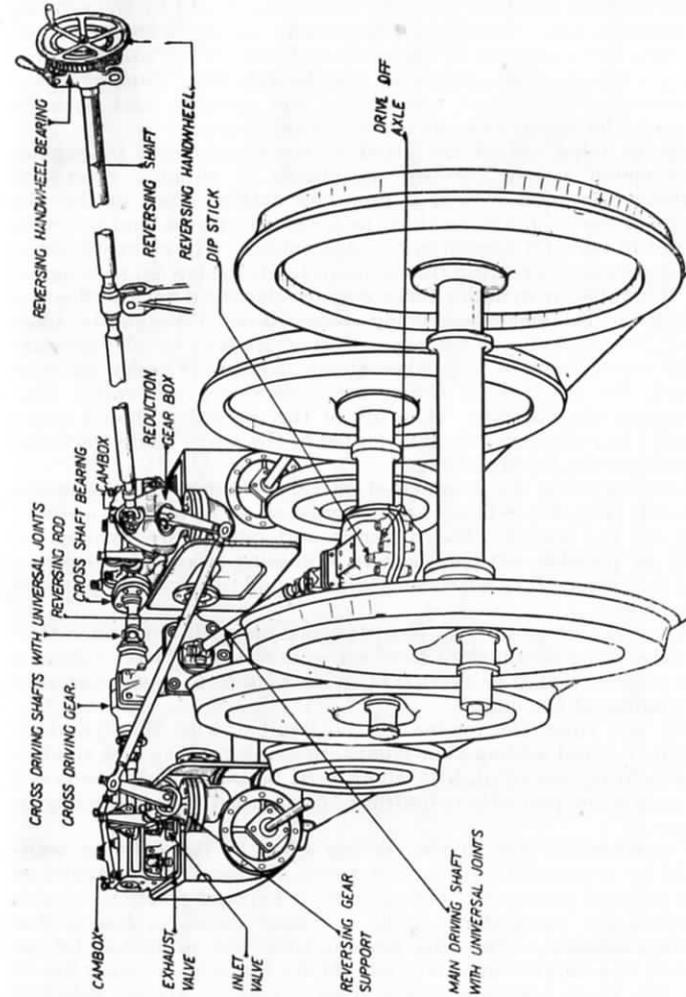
PERSPECTIVE VIEW OF CAPROTTI VALVE GEAR APPLIED TO A TWO-CYLINDER LOCOMOTIVE.
